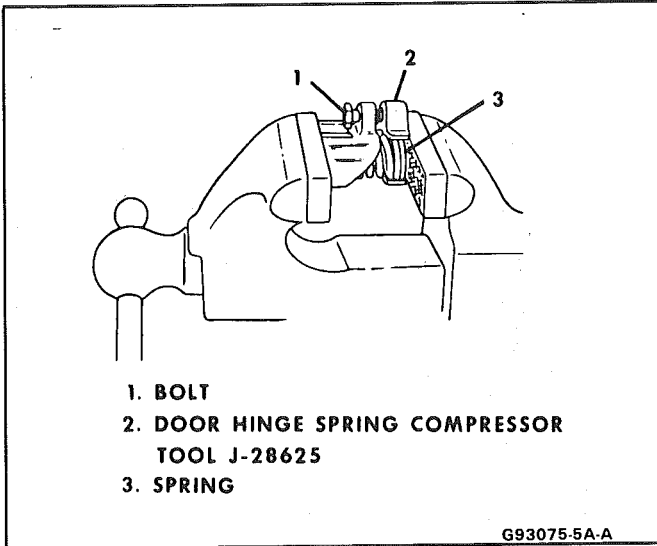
Using Bench Vise to Compress Spring in J-28625
